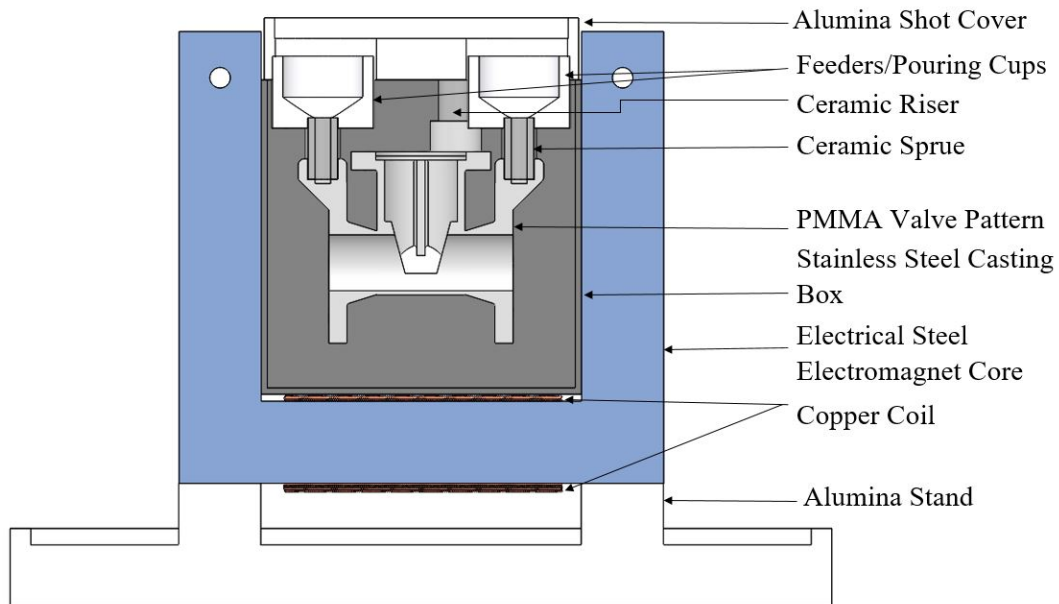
The magnetic moulding casting assembly as modelled in SolidWorks
